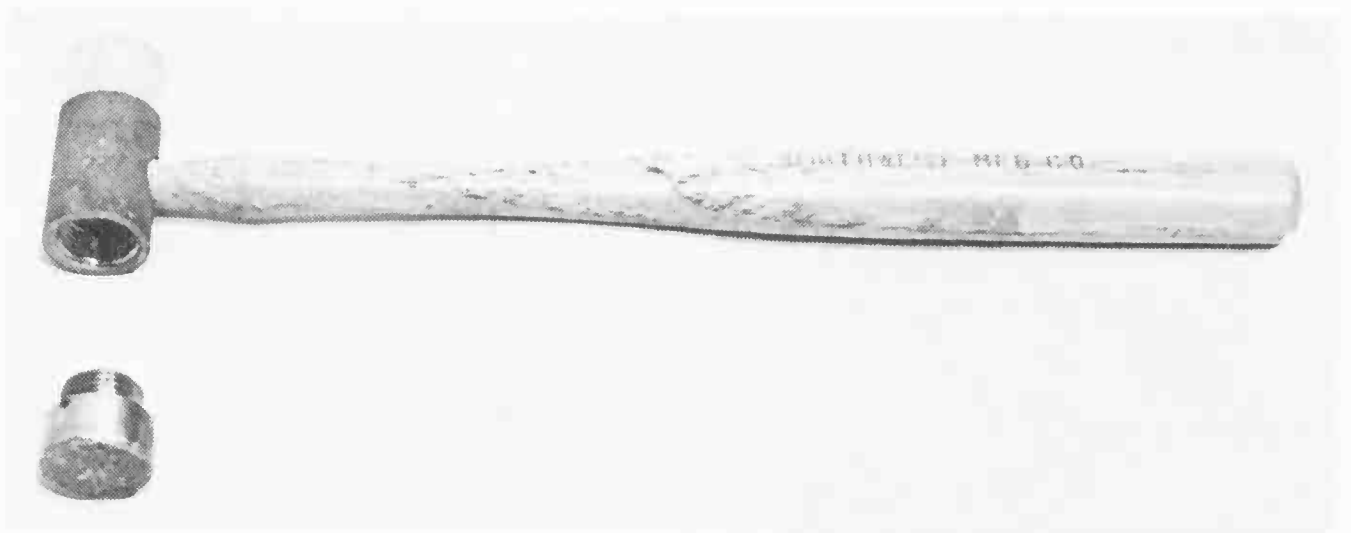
Brass-nylon hammer should be standard equipment on every gunsmith's bench.
